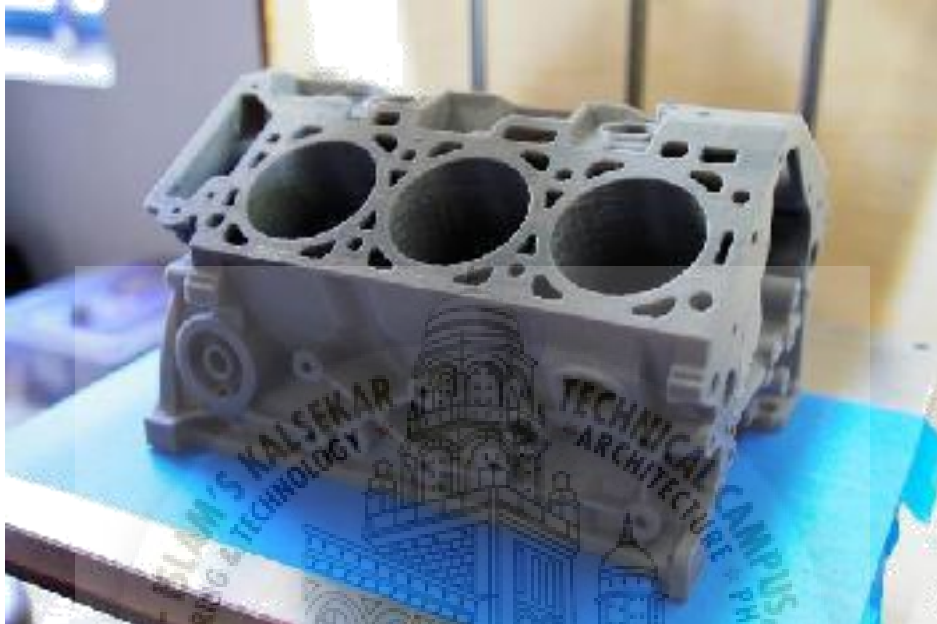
Cylinder block printed on FDM based 3D printer [1]
